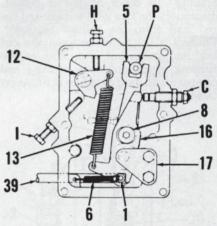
Drawing of governor and throttle control linkage. Refer to Fig. L4-20 for parts identification.
